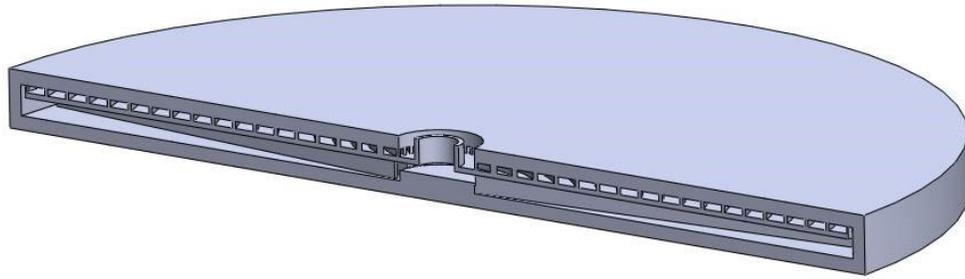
CAD drawing of a full-scale SMR reactor with cut-away on a centerline.
